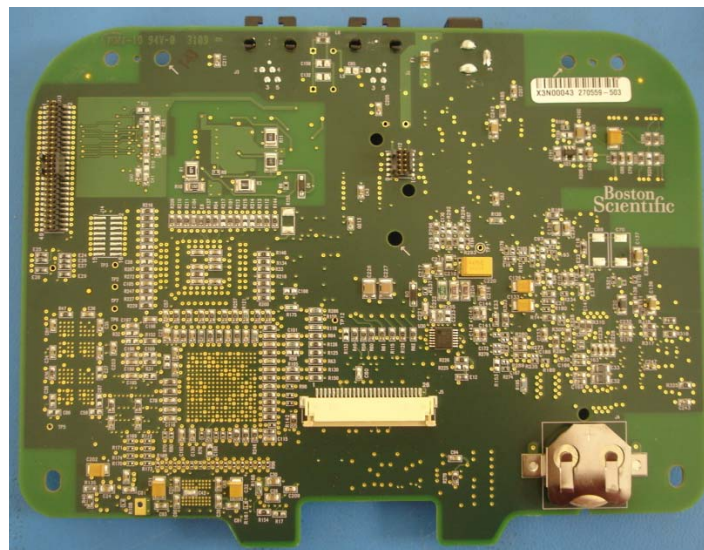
Wand Printed Circuit Assembly – Top Side (for reference only)
